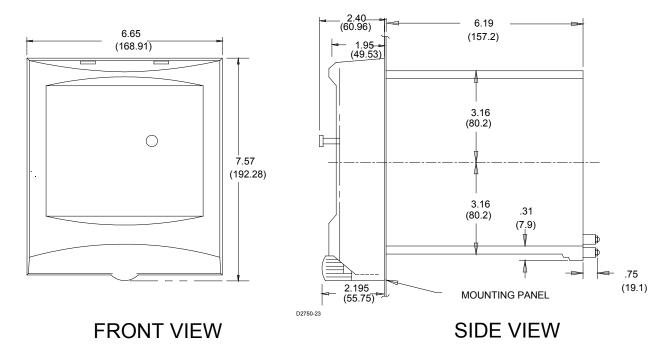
Outline Dimensions, A1 Case (Semi-Flush Mount)
